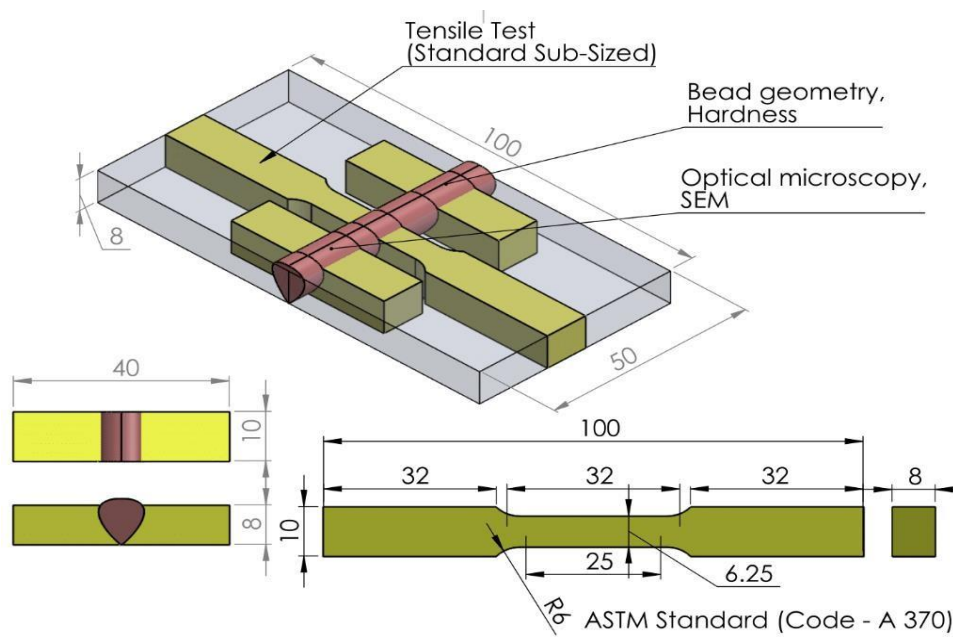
Schematic diagram representing all the post welding processes performed on the welded specimen.
